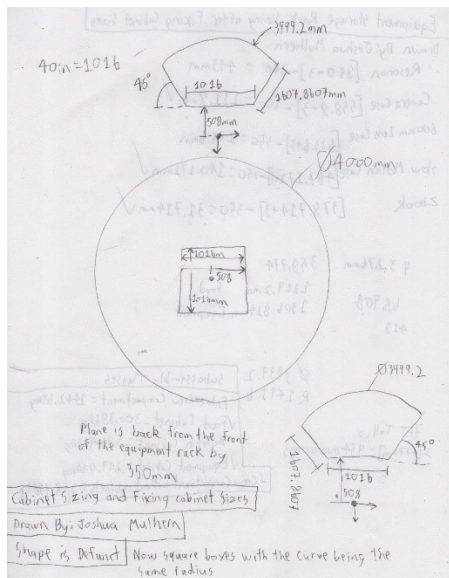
Hand Drawing Cabinet sizing and fixing cabinet sizes
